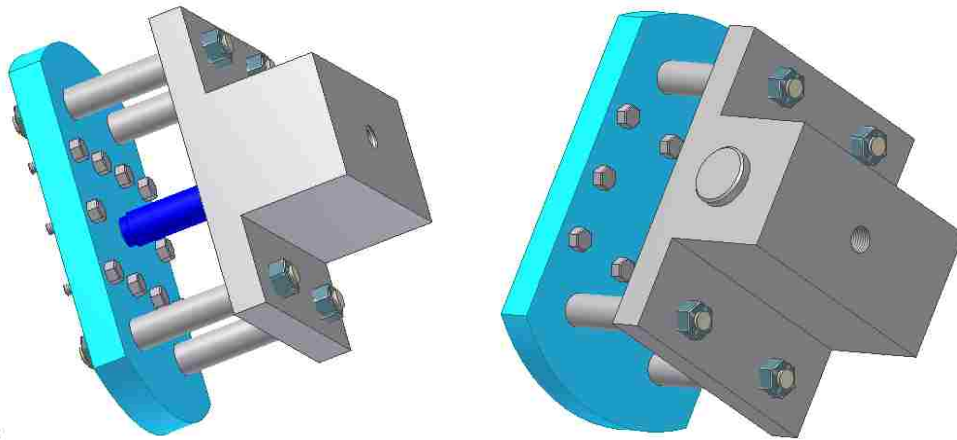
Three-Dimensional Assembly of PFI Injection Adapter
